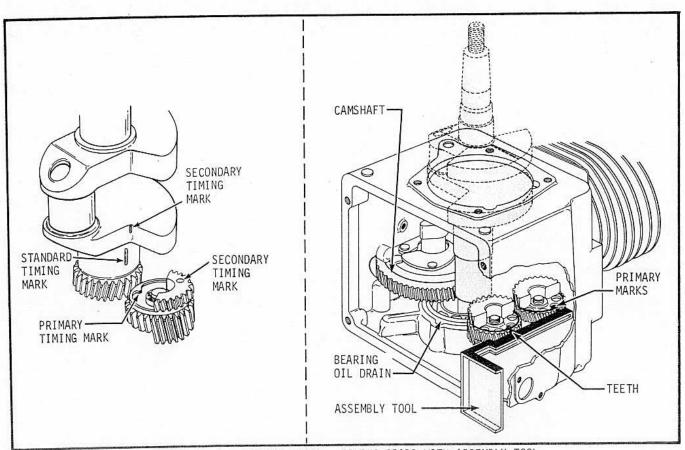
TIMING MARKS - TIMING GEARS WITH ASSEMBLY TOOL
